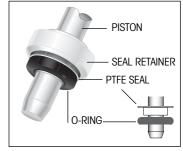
PISTON SEAL ASSEMBLY (200 µL SHOWN)
